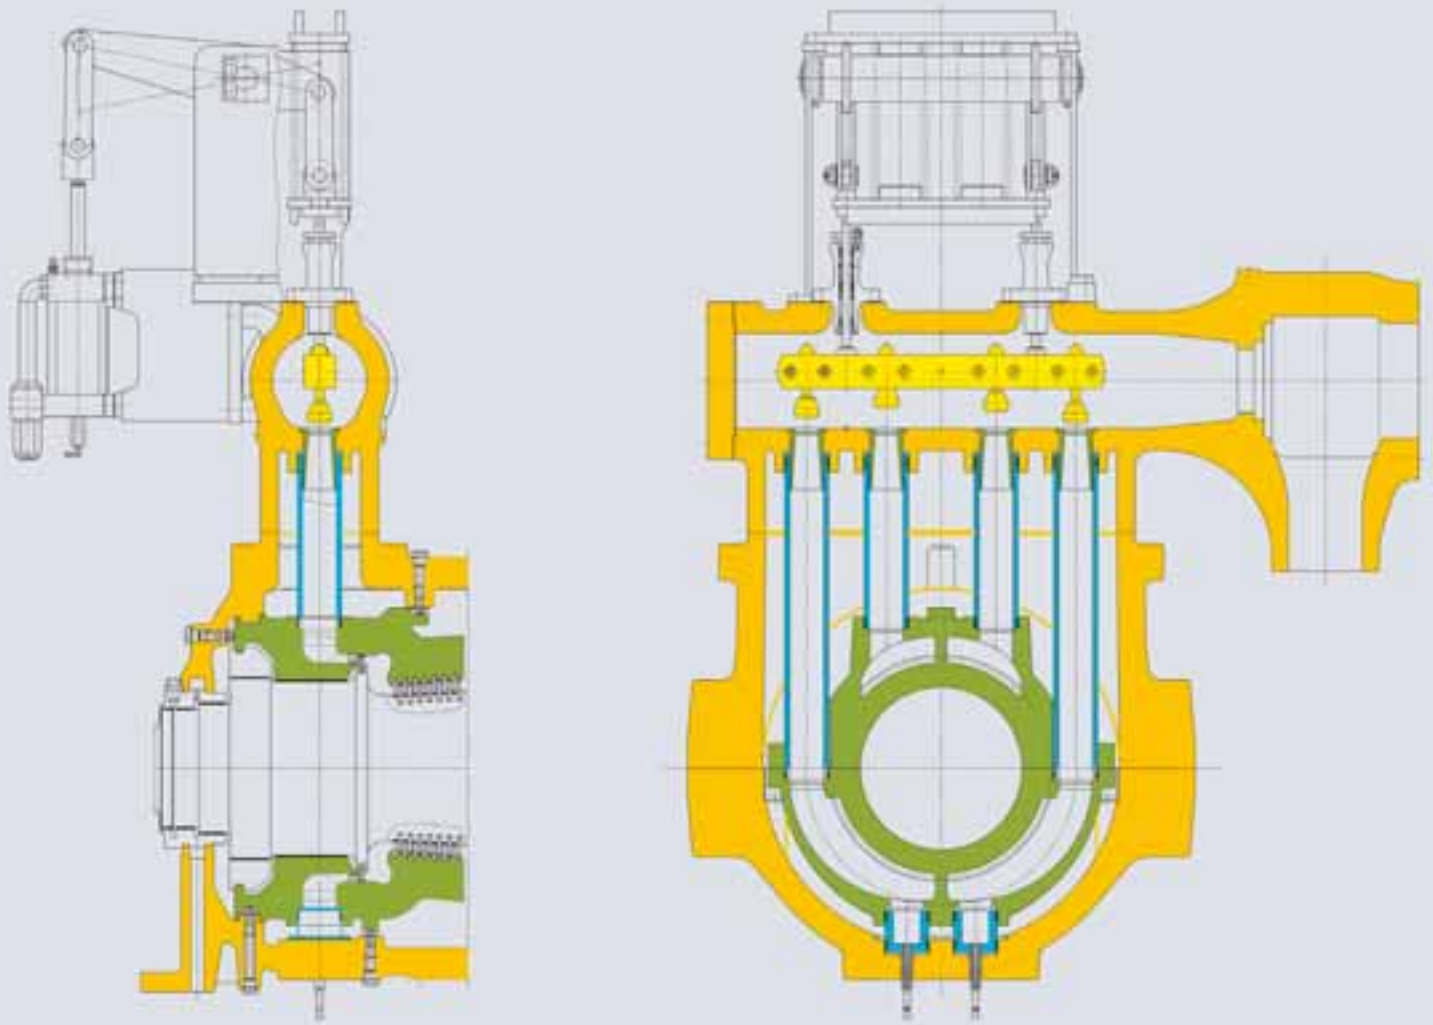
shows the arrangement and function of the valve control system on MAN Diesel & Turbo steam turbines; the trip valve and control valves are opened by oil pressure.
